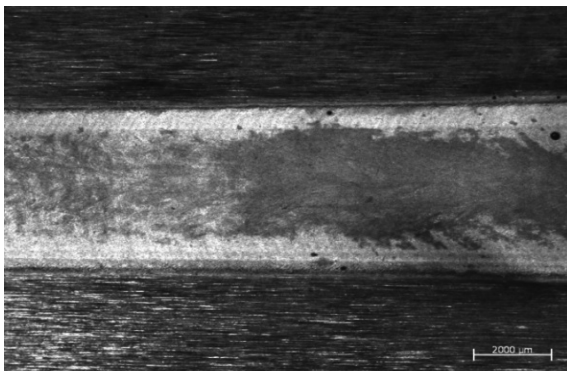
View of the transformed layer after melting HS6-5-3-8 steel, laser power
